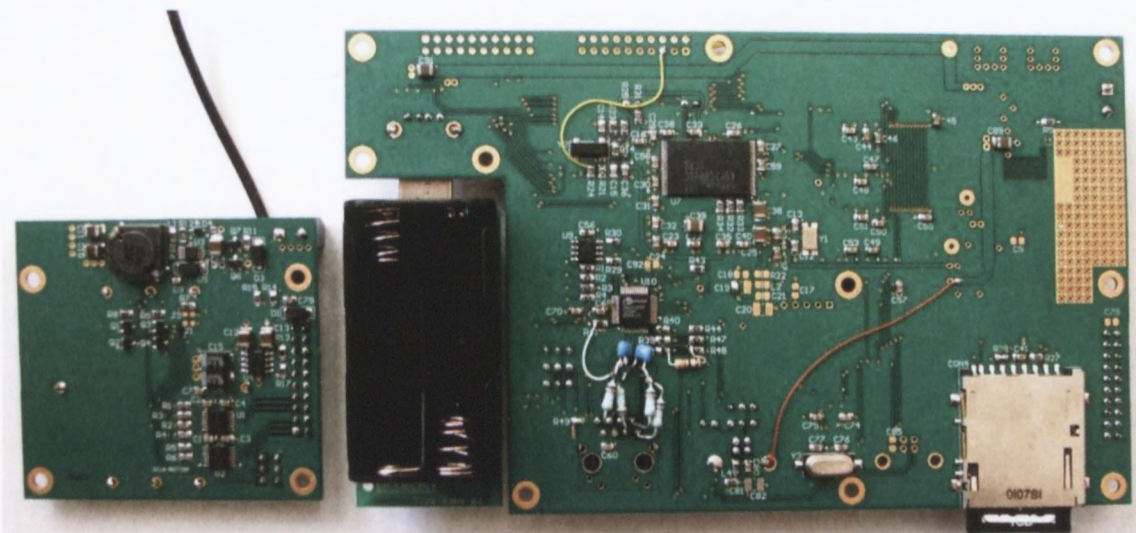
The assembled gateway and communication module PCBs, bottom layer
